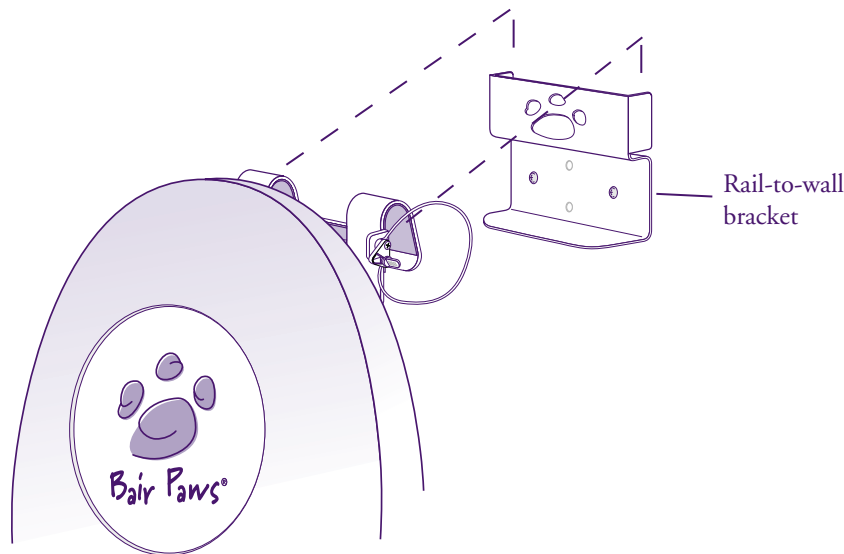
Placing the warming unit with a rail-mount onto the rail-to-wall bracket.
